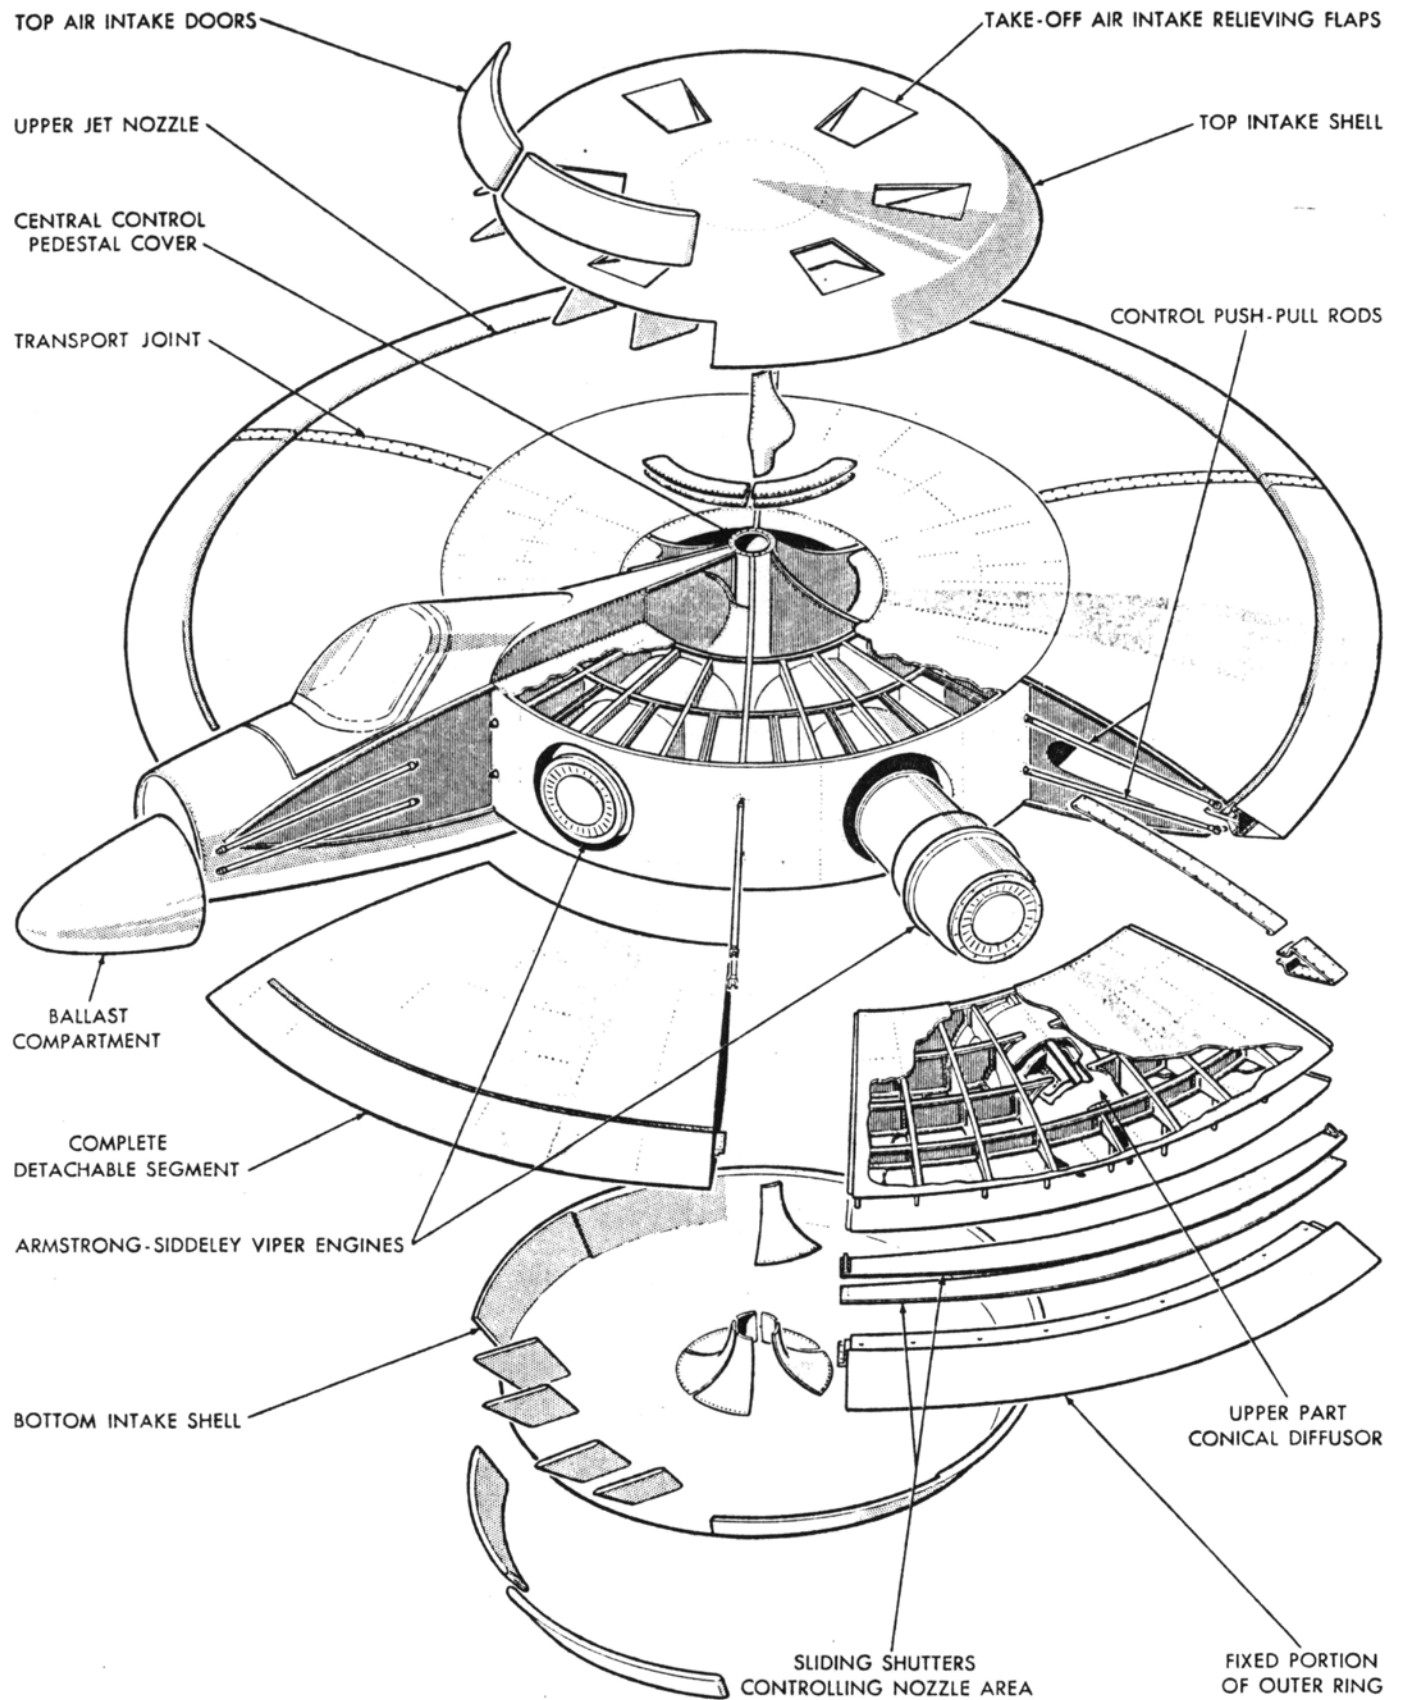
EXPLODED VIEW OF TEST AIRCRAFT
